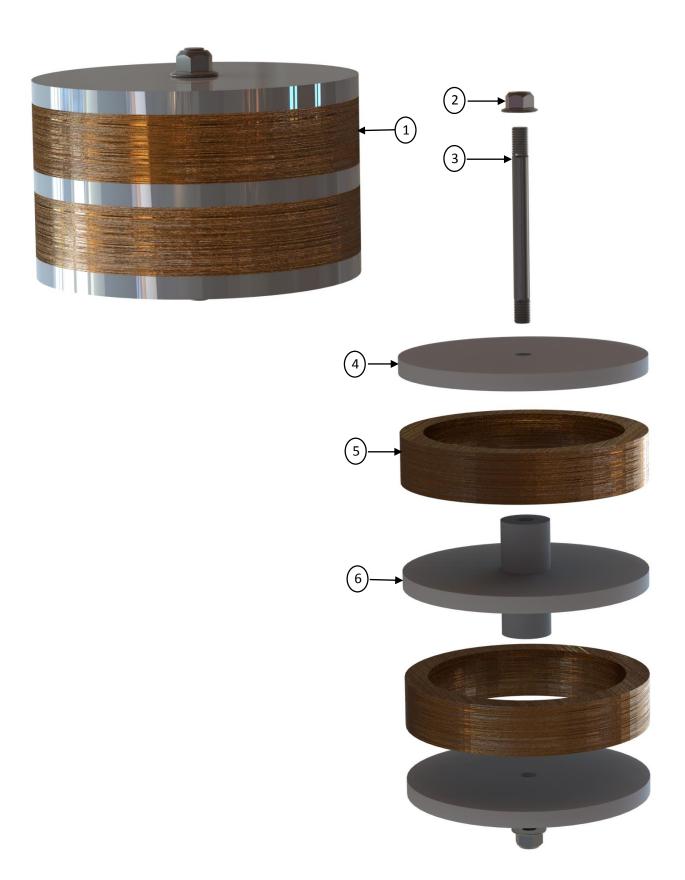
Renderings of the piston. 1) Piston, 2) locking nuts, 3) piston bolt, 4) end spacers, 5) permanent magnets in Neodymium N35 (HKCM Engineering e.K, 2015), 6) mid spacer with an extra extrusion on both sides to hinder that the magnets gets compressed too much.
